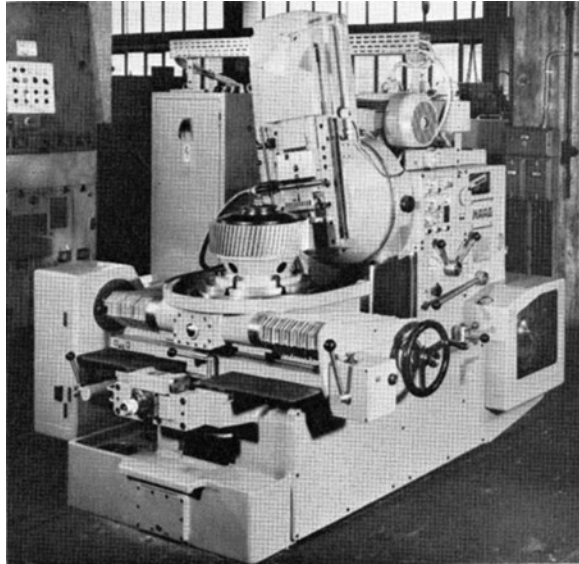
Rack shaping a helical gear. (Courtesy of Maag Gear Wheel Co., Zurich, Switzerland.)
